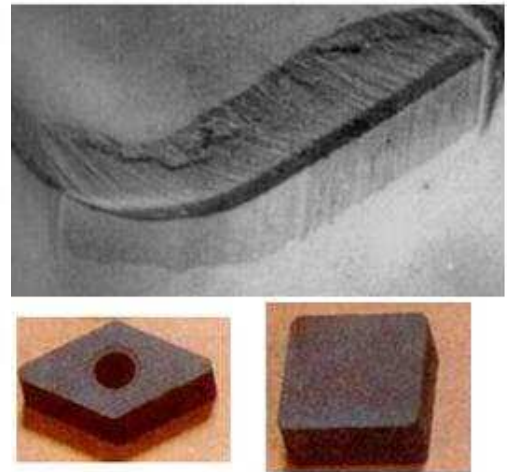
(c) Photographic view of the wear pattern of a turning tool insert
